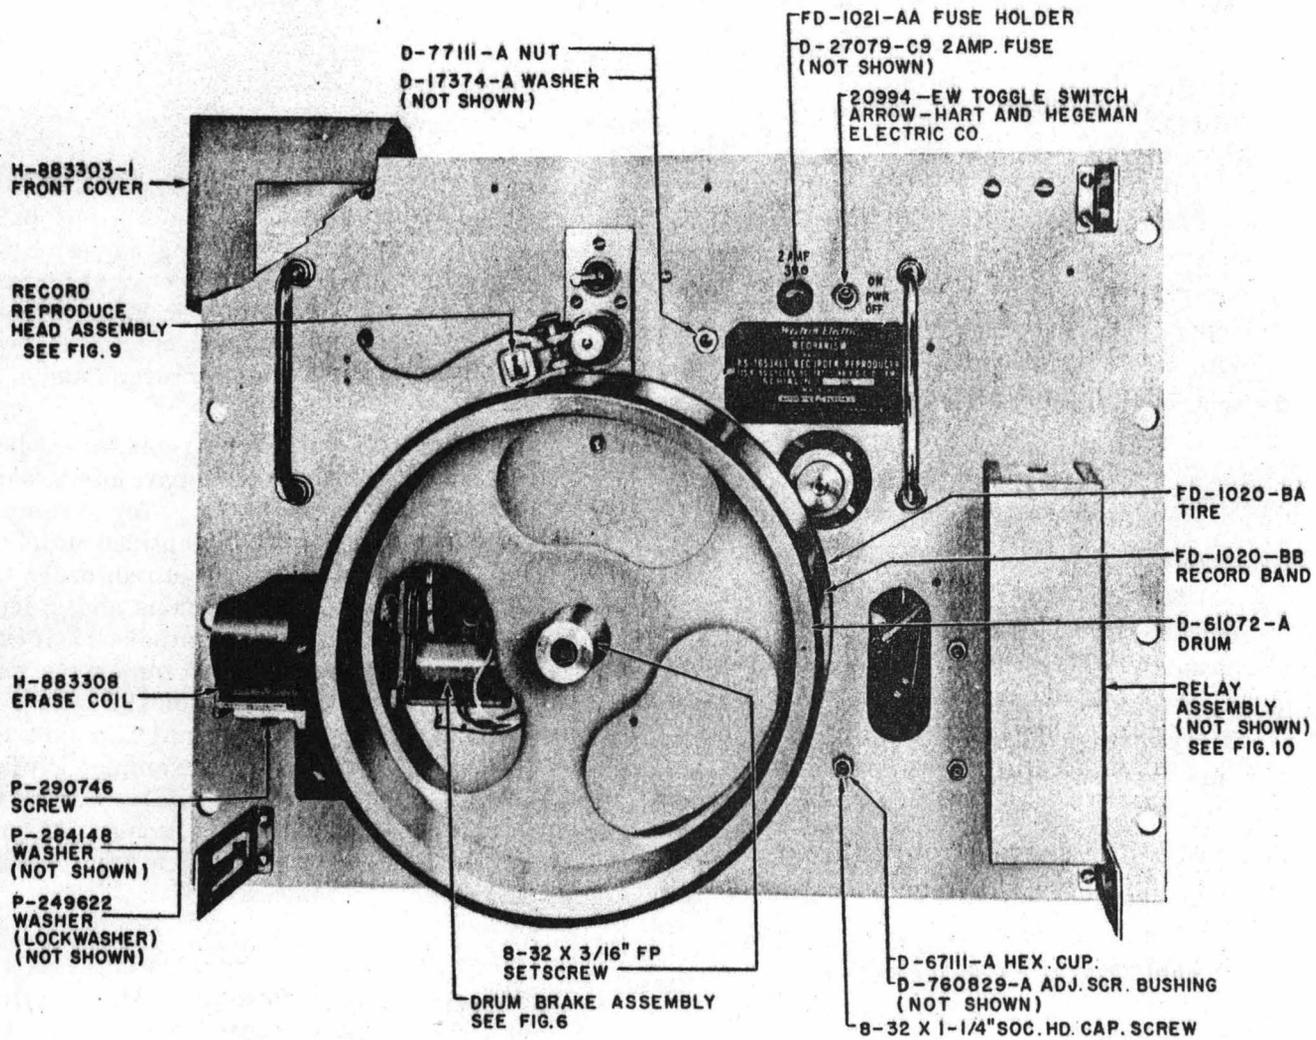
Recorder-Reproducer Mechanism - Front View
